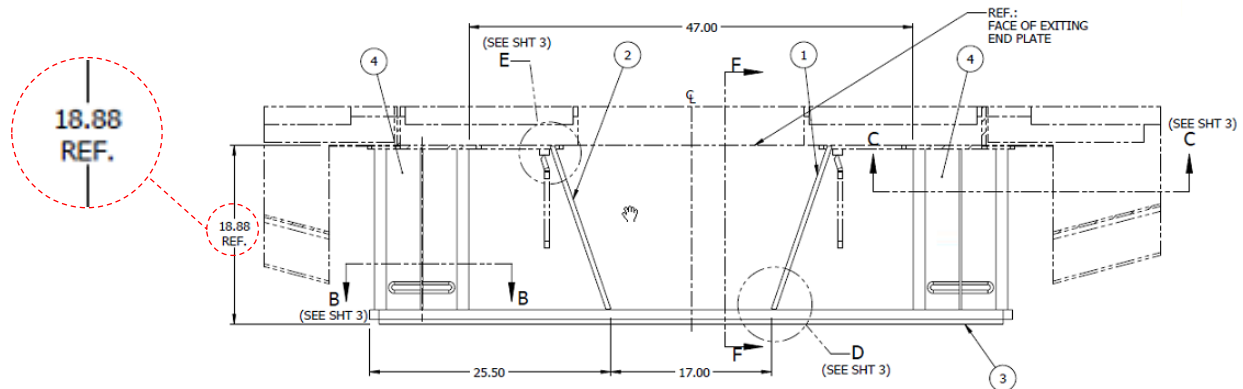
Excerpt from drawing 14424-0400 [8] showing that top DAC assembly extended 18.875” forward from the end plate of the CEM locomotive
